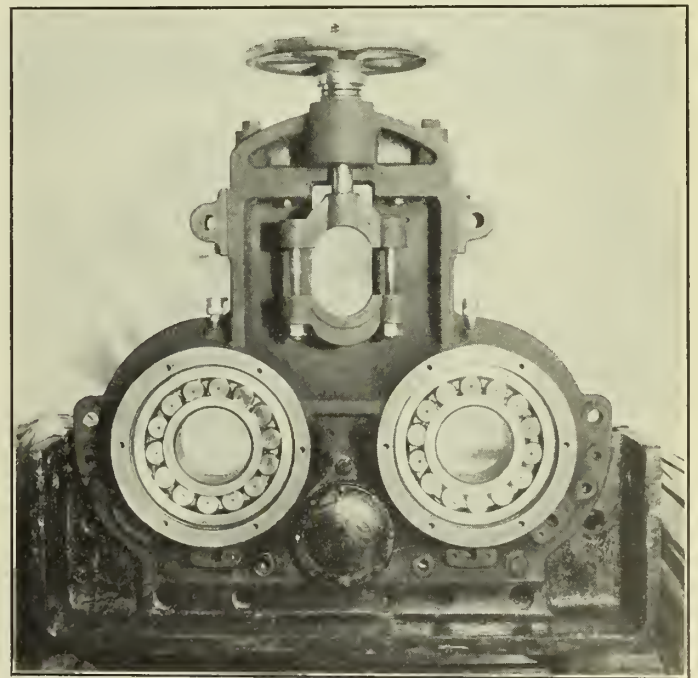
Vacuum Dryer Type 11-48-154, Outgoing Seal End Frame showing Roller Bearings and also Rubber Roll Lifting Device.
